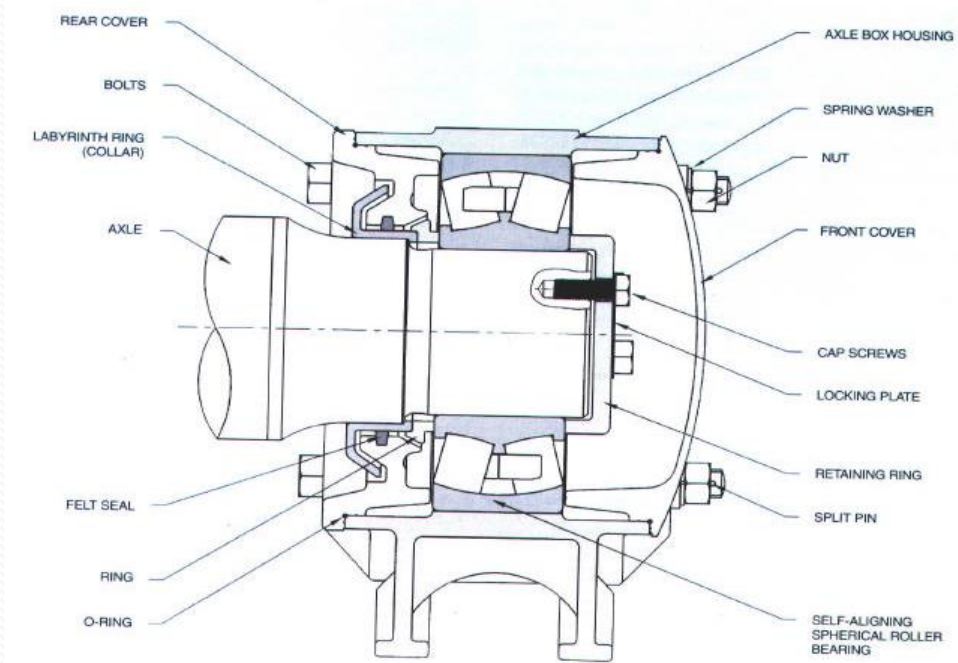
AXLE BEARING LONGITUDINAL SECTION
